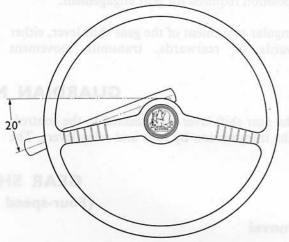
Gear shift lever location after adjustment of change speed linkage
